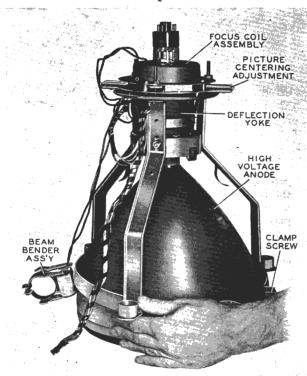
ASSEMBLING PICTURE TUBE IN MOUNTING
